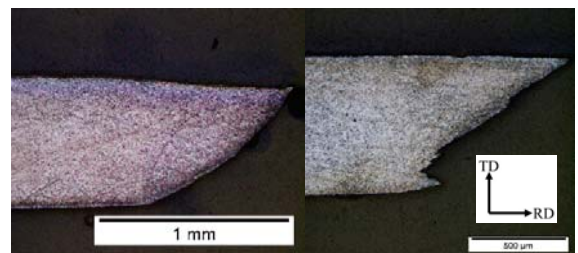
Side view, RD fracture strain (left) 0.34 (right) 0.26
